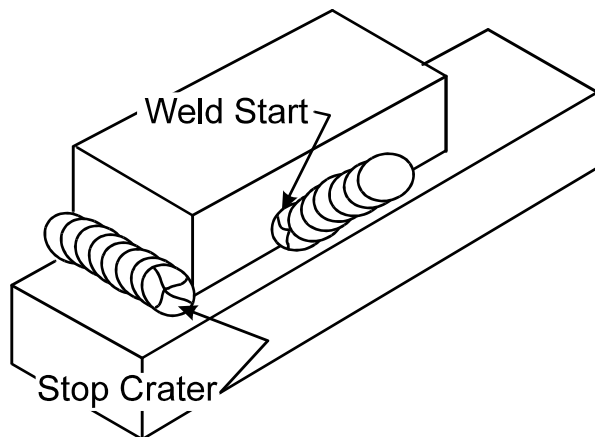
Permissible Cracks in the Stop Region of a Weld
